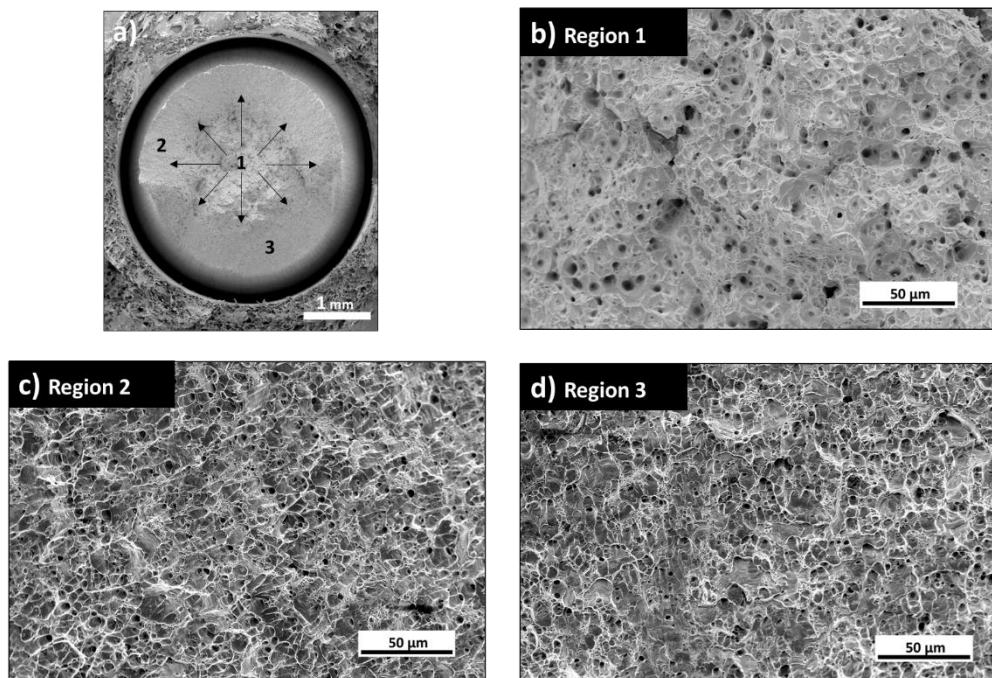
SEM images of fracture surfaces of the AA6056 rivet with the fracture occurring through the metallic, rivet outside the polymer composite plate. Joint produced with condition C13 (RS: 16000 rpm, DaF: 9 mm and JF: 2200 N).
